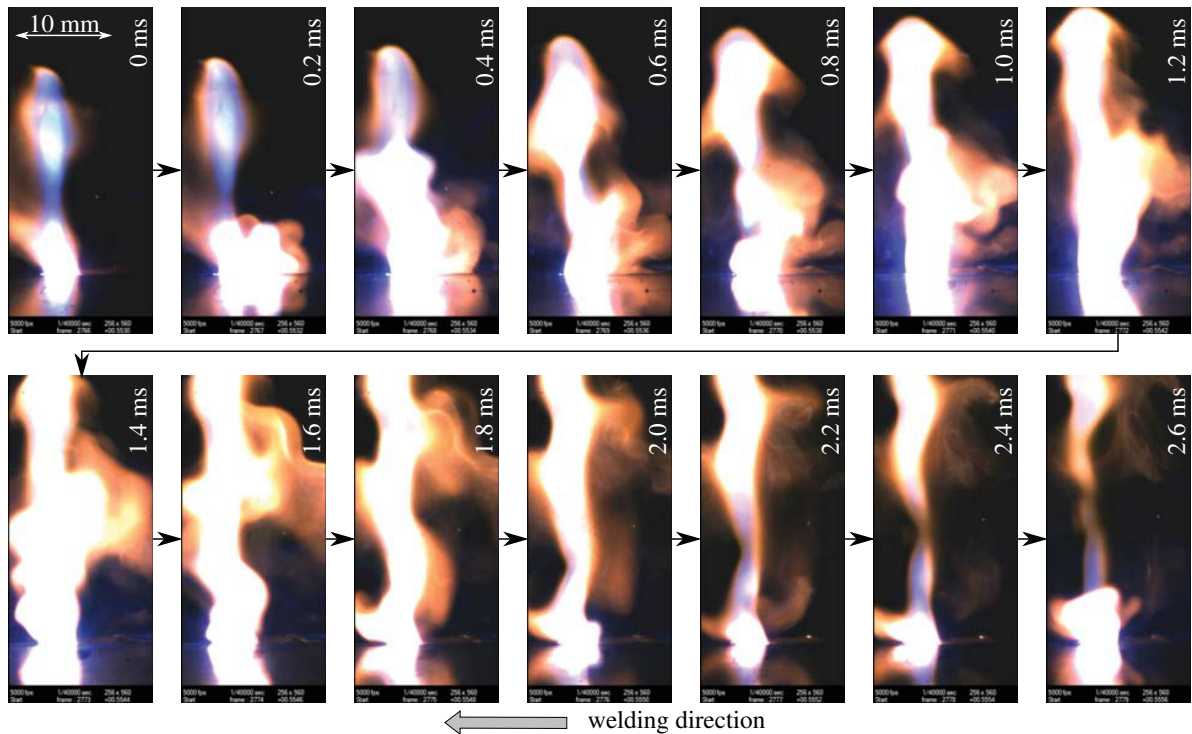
High-speed image of the vapor plume. Welding parameters: laser power 17.6 kW, focus -8 mm, welding speed 1.8 m/min, Argon 10 l/min.
